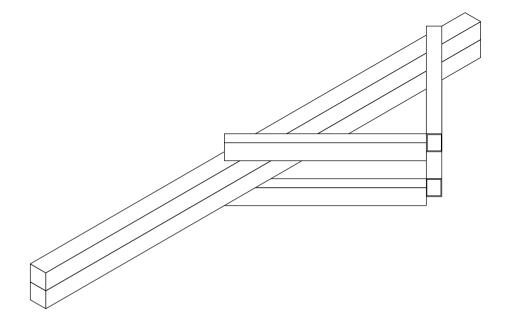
welding animal shaft and axle support struts assemblies.
